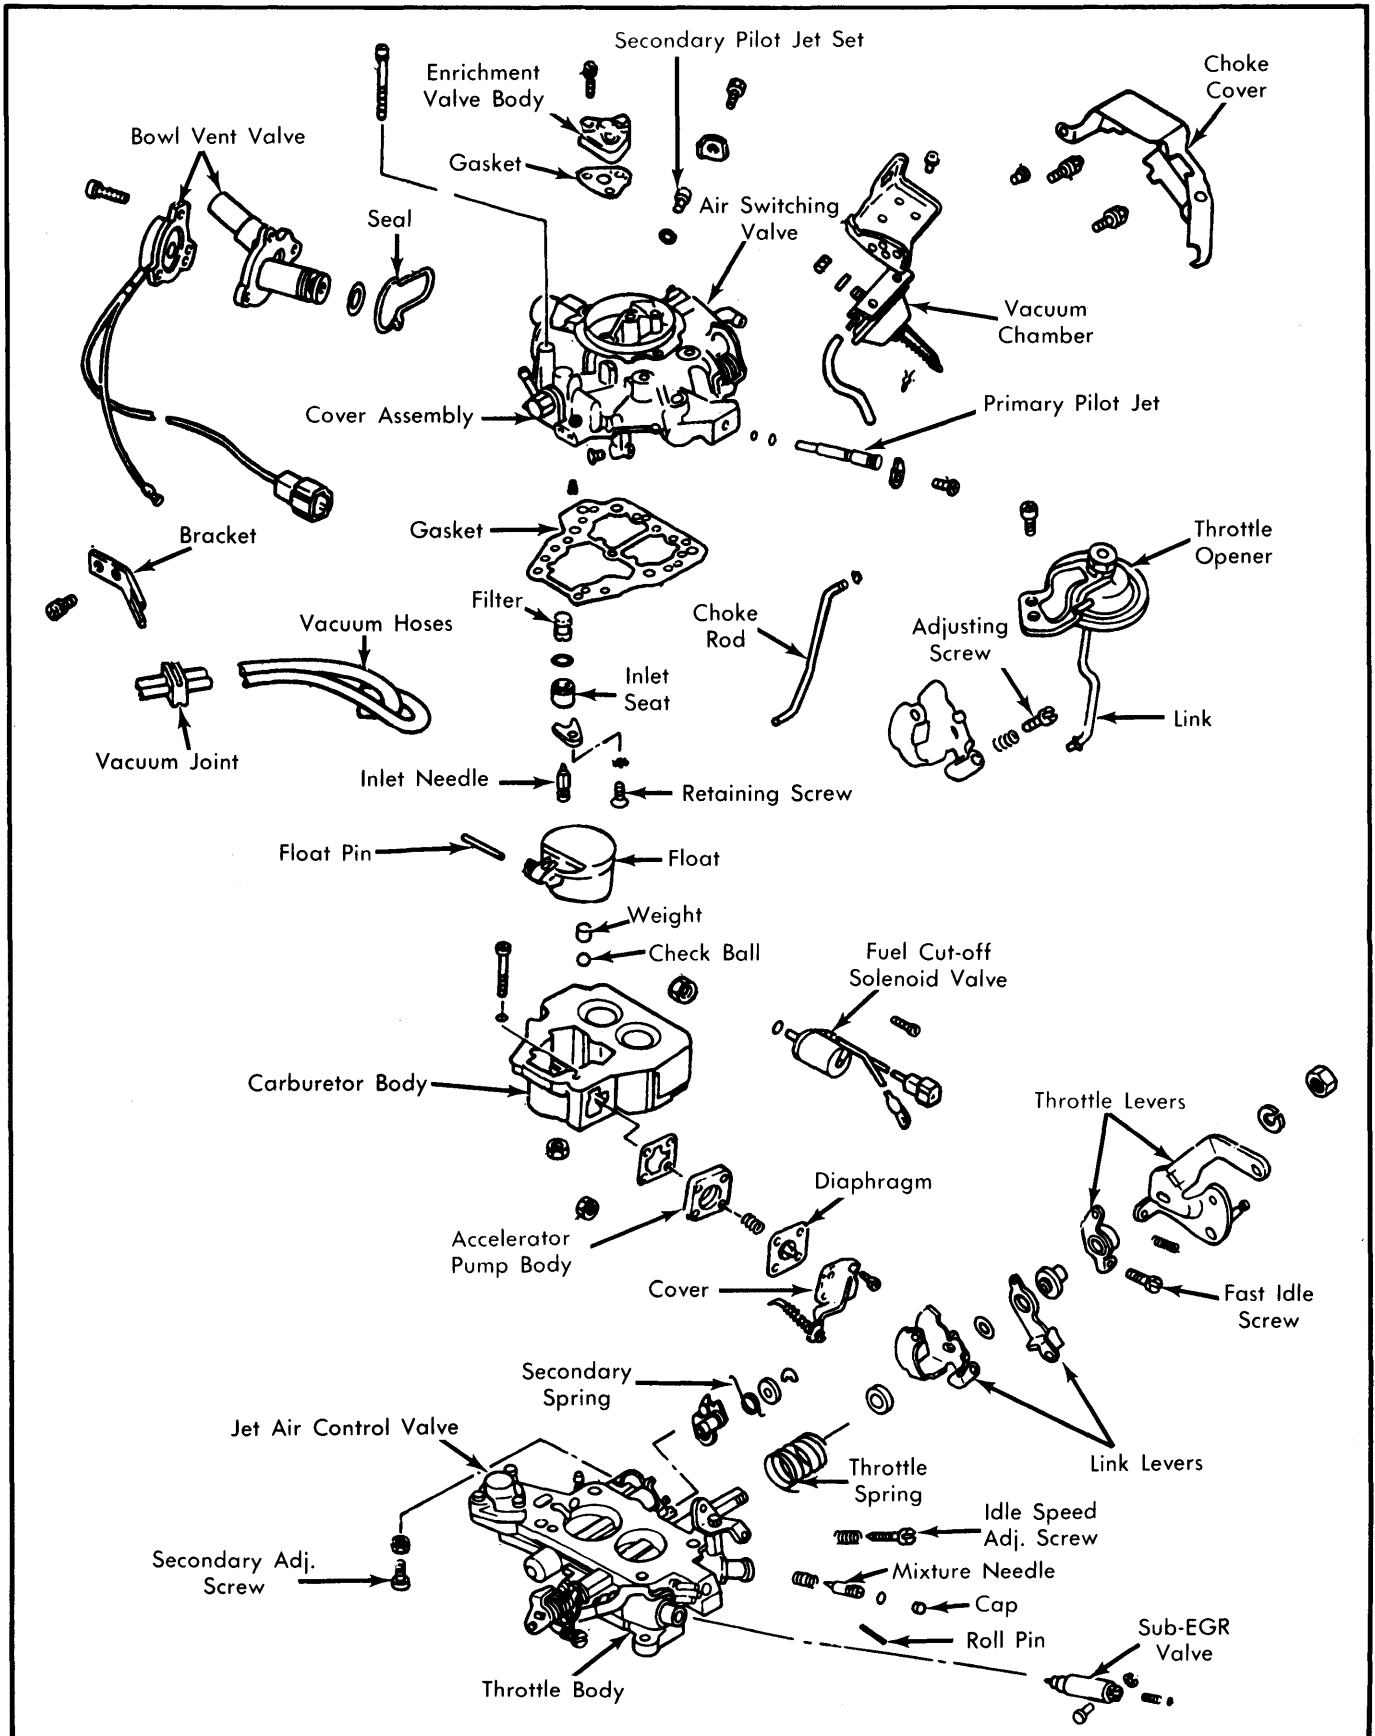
Exploded View of Chrysler Corp. (Mikuni) 2-Barrel Carburetor
